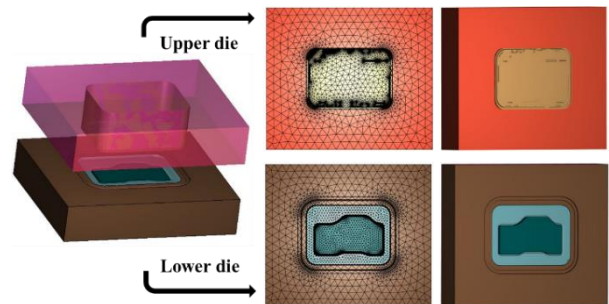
FE-model of dieset assembly for plate forging of AZ31 thick sheet
